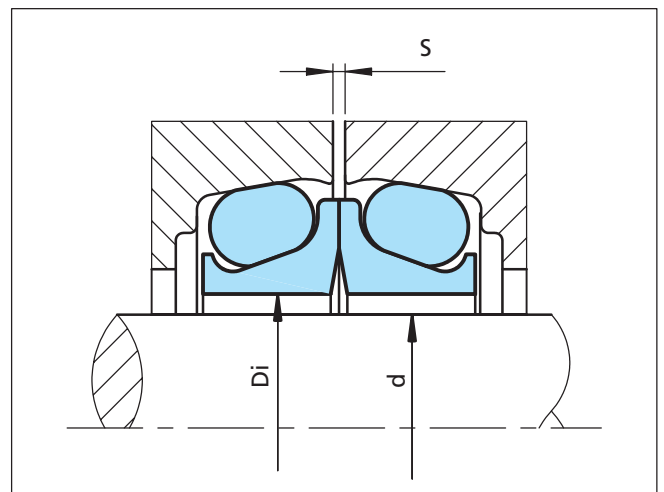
Roller Bearing Steel design with smooth and cylindrical treatment at the inside diameter
